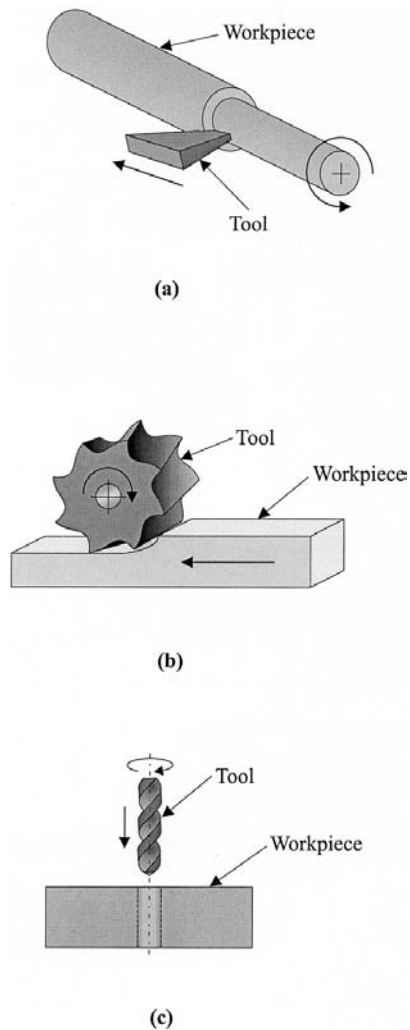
(a) Turning; (b) milling; (c) drilling.
